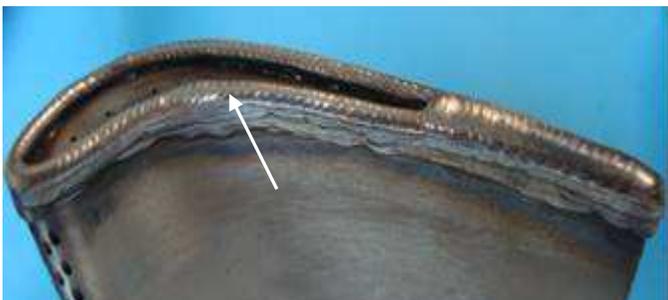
Manual GTA weld restoration of the bucket squealer tip
